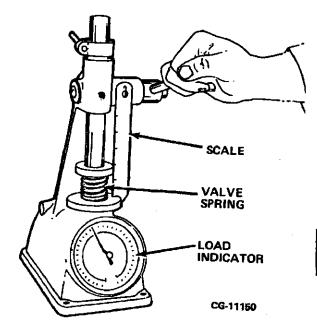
Checking Valve Spring Tension Using ZTSE-2241
